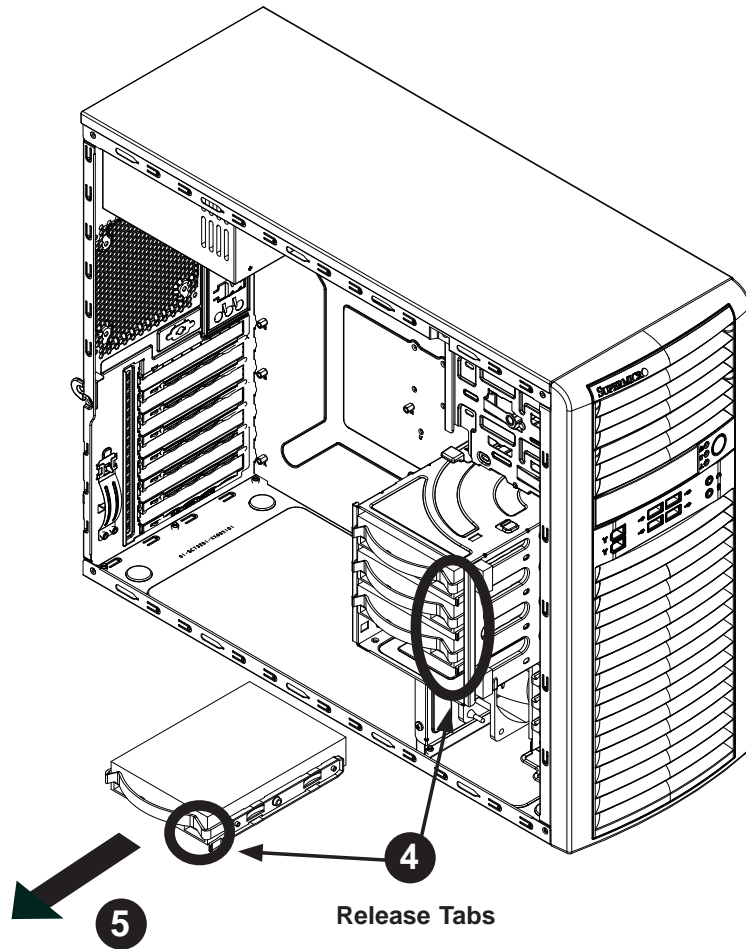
Removing a Hard Drive Carrier from the Hard Drive Cage
